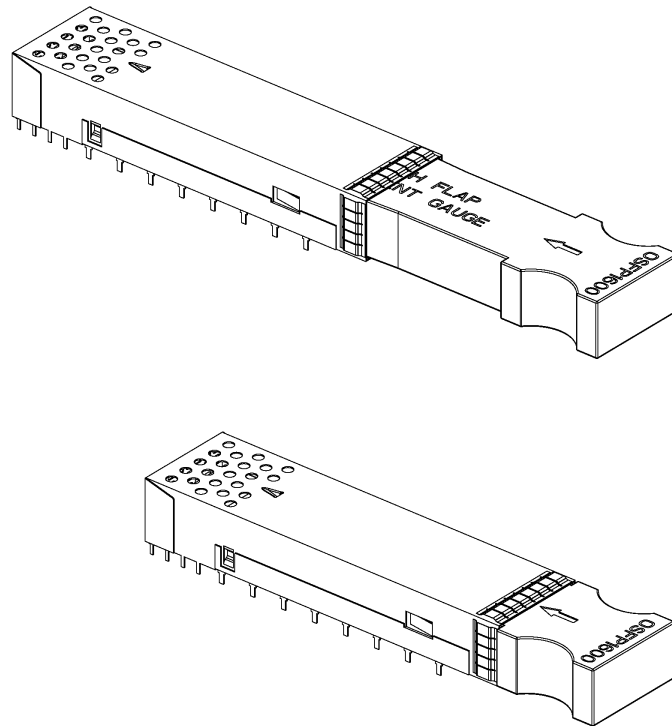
OSFP1600 Cage flap location inspection gauge (Reference)
